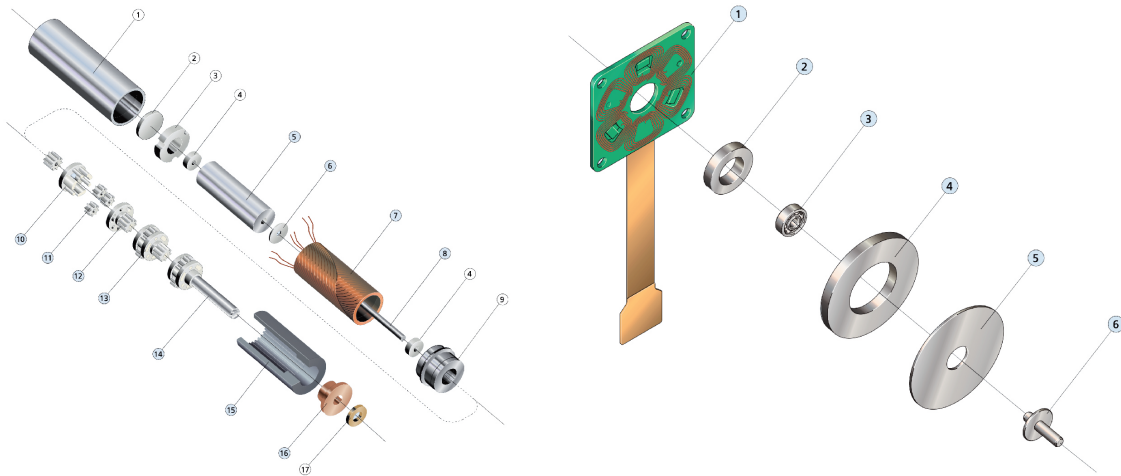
Exploded-view Drawing of Faulhaber Series 0206 B (left) and Series 1202 BH (right).
